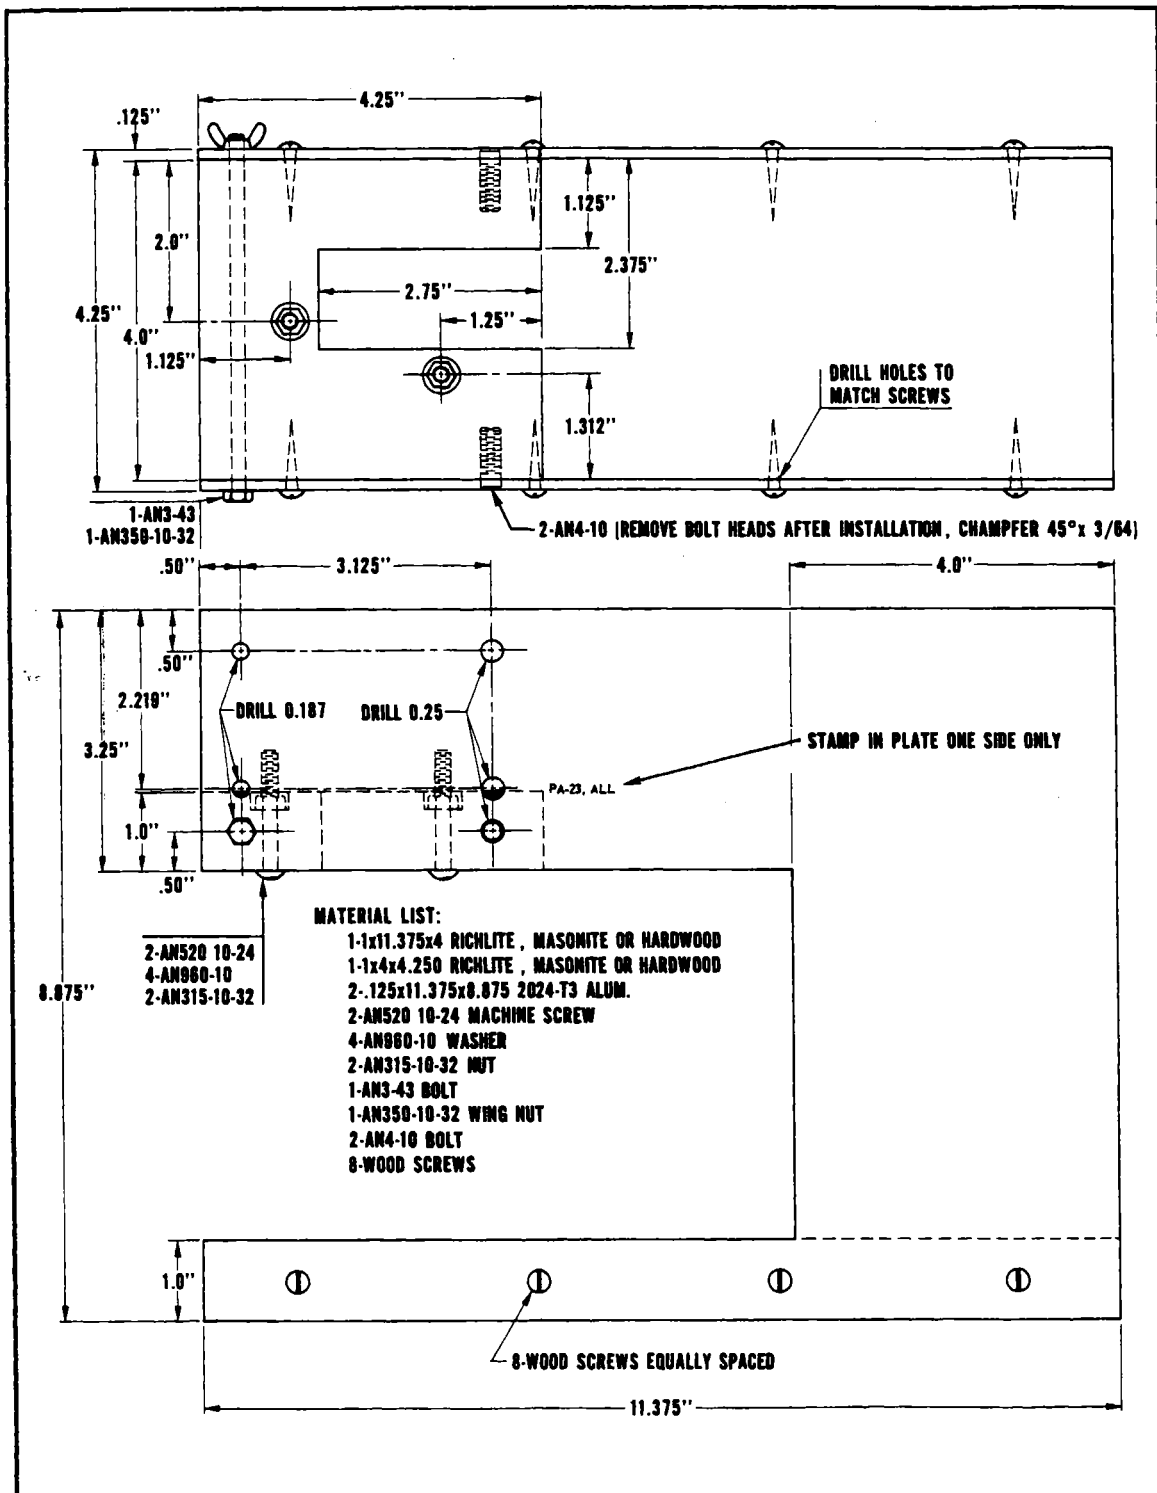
Fabricated Fuel Quantity Transmitter Checking Jig
